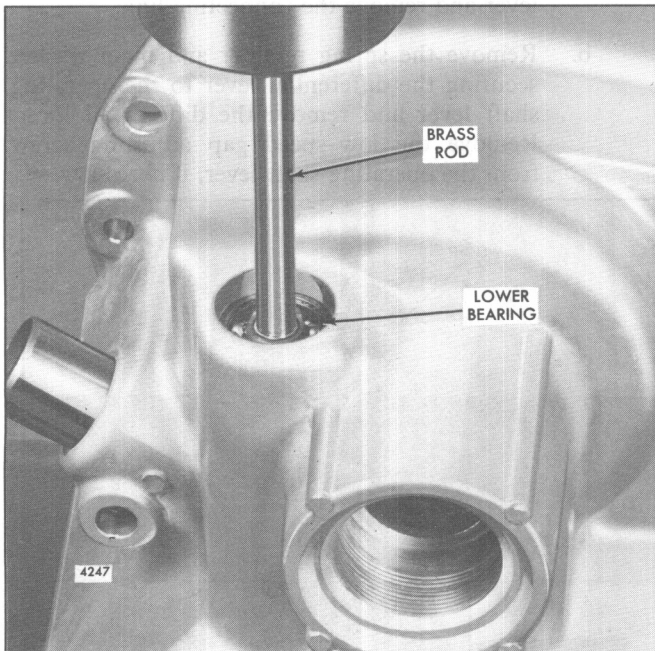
Removing Operating Shaft from Operating Shaft Lower Bearing
